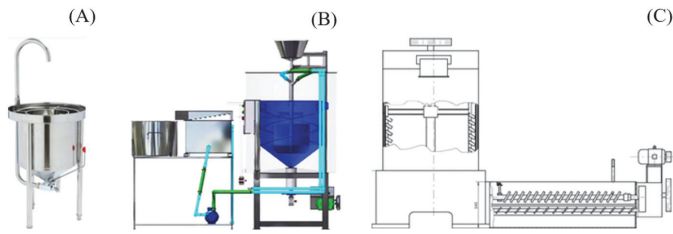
Water type machines: (A) manual washing machine model ASL-XMJ10; (B) sesame washing machine from Rajamangala University of Technology Lanna; (C) seed cleaning and drying machine model XMS40
